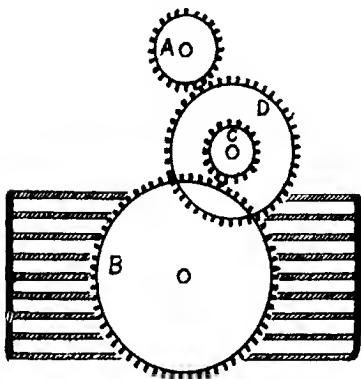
Gearing for Spiral Work, Garment Rollers. A, 60-tooth wheel on roller mandrel; B, 360-tooth wheel on guide screw; C, 36-tooth wheel as driver wheel; D, 120-tooth wheel as the driven wheel.
